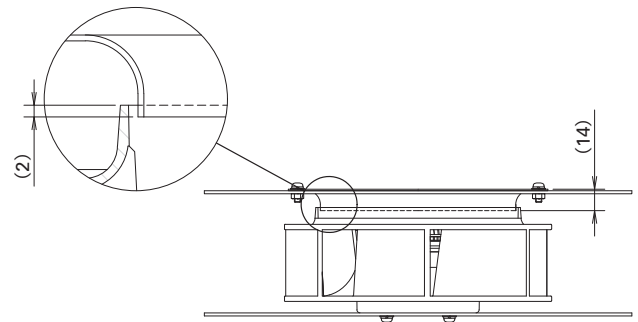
Example of the new model and inlet nozzle mounting dimensions (unit: mm)
